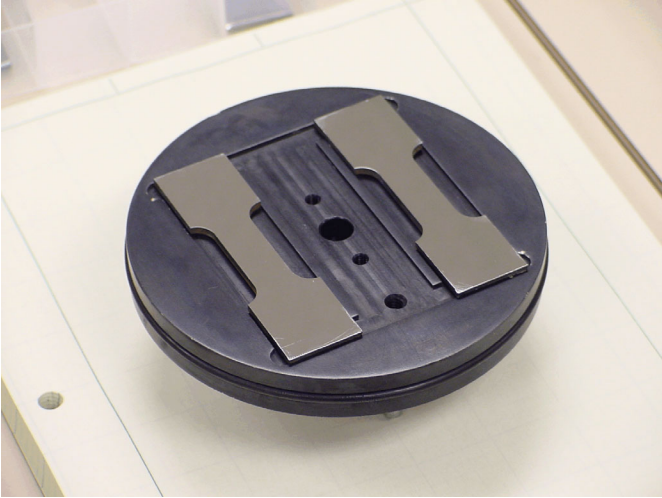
The fixture used to hold the specimens during grinding and polishing.
